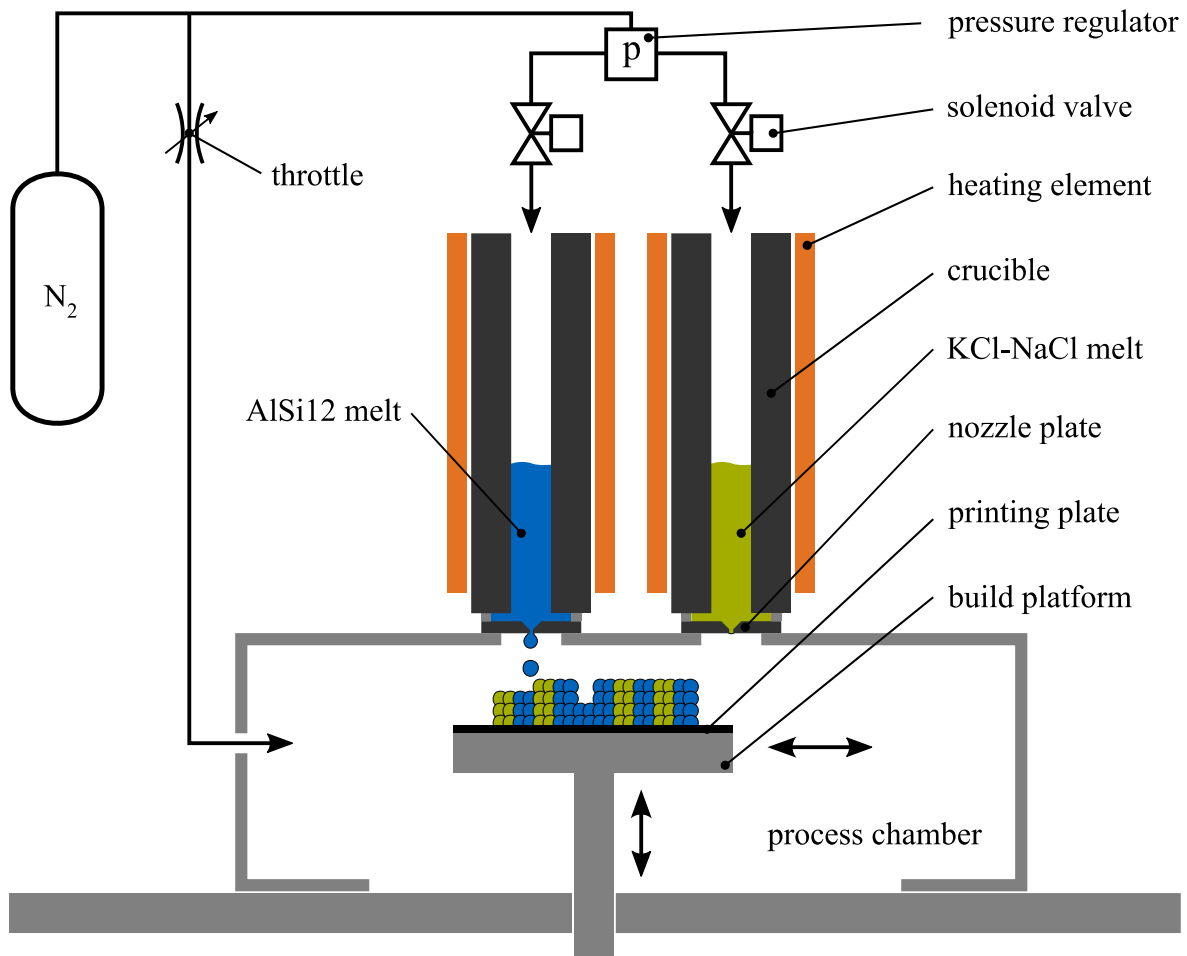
Schematic of the MJT test stand with the duplex print head for LMJ and LSJ. The print head consists of two heated crucibles, each with a nozzle plate on the bottom. Droplets are ejected onto a printing plate that is placed on top of a heated, movable build platform. The pneumatic droplet ejection is realized by a pressure regulator and solenoid valves. The process chamber is nitrogen-purged.
